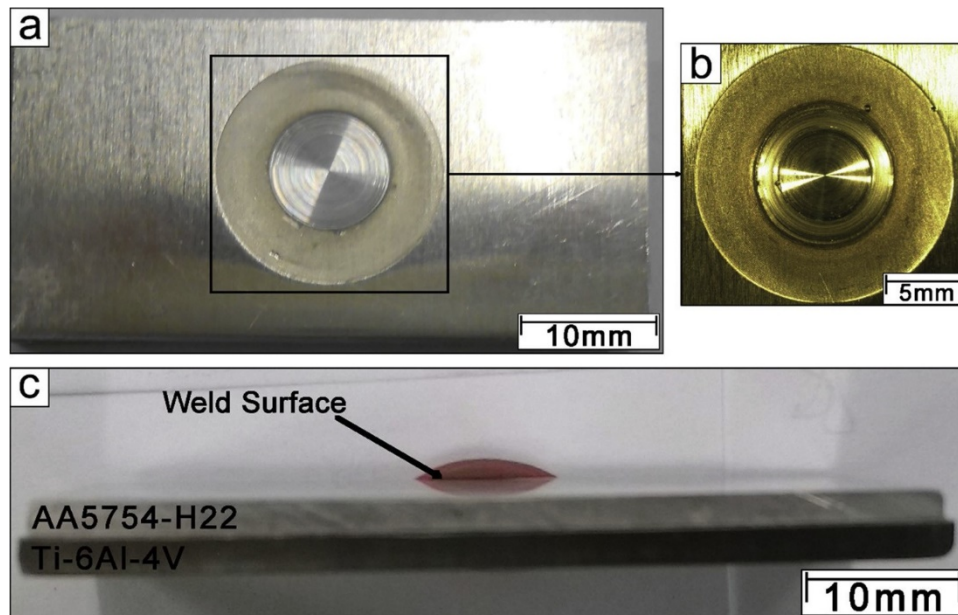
(a) Surface of the AA5754-H22; (b) Macroscopic image of the refill friction stir spot welded aluminum surface; (c) The cross section of the welded joint.
